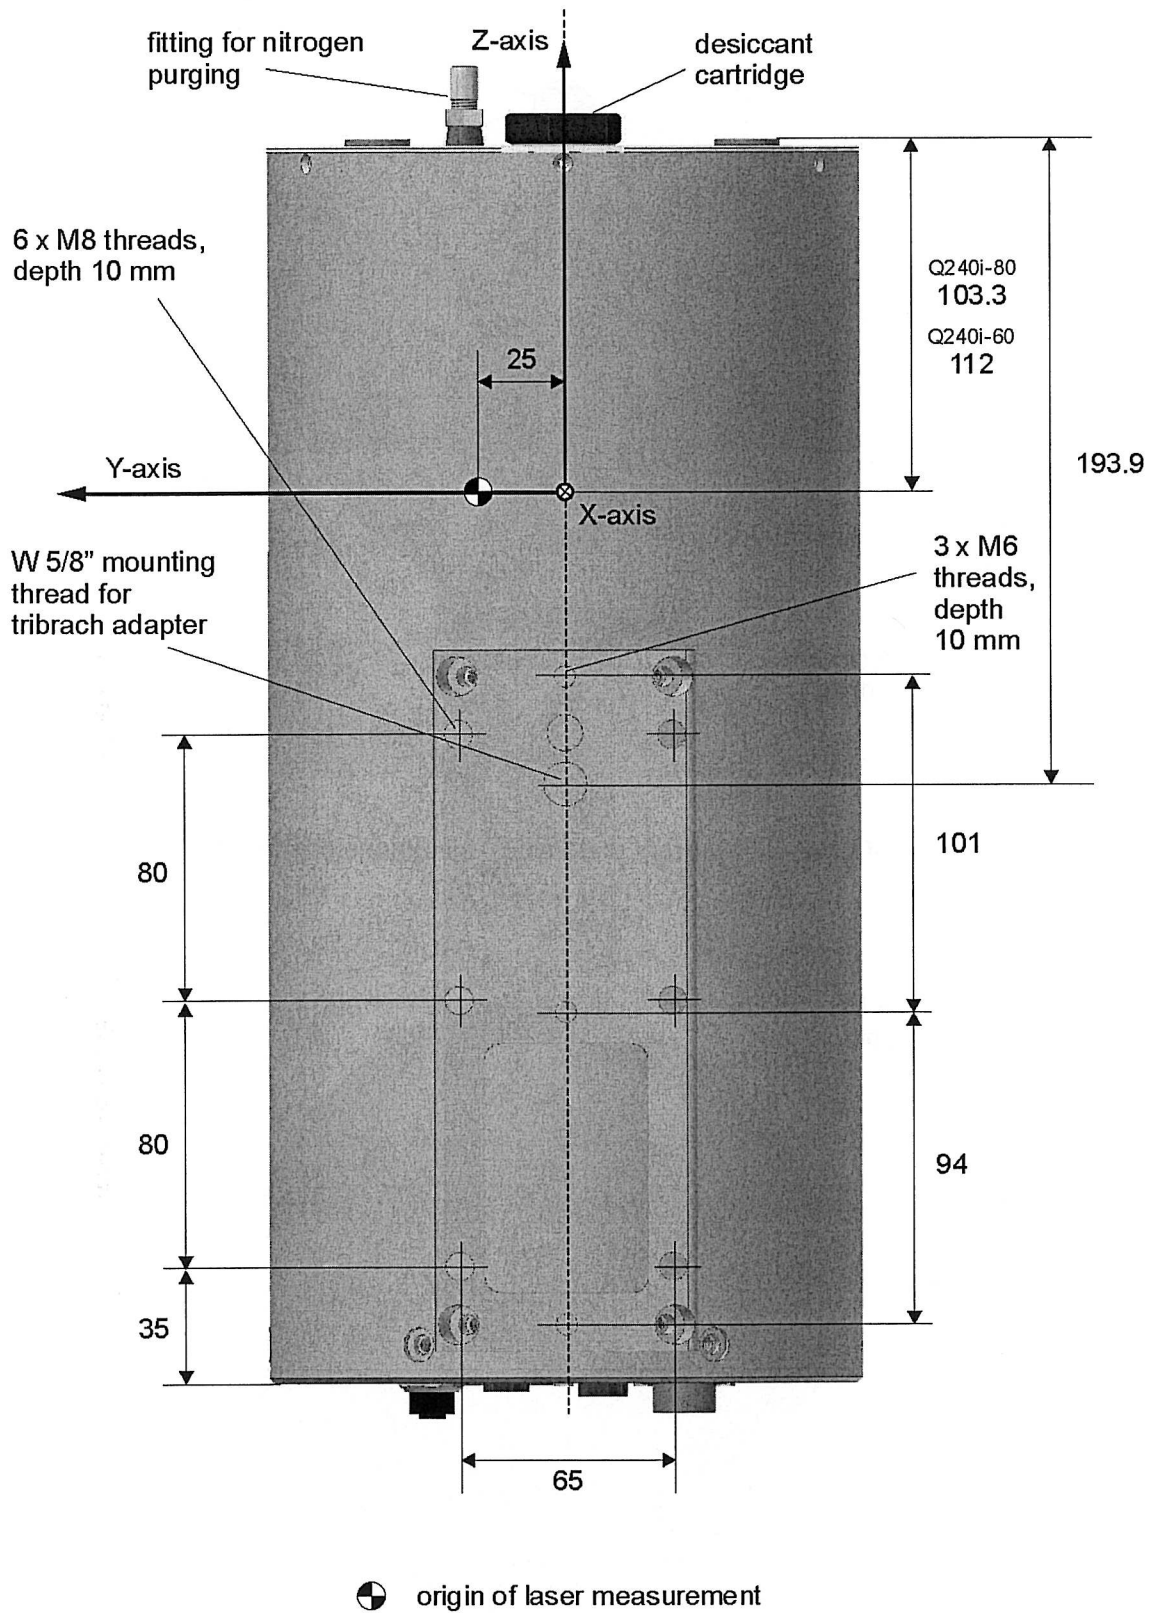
Top view of LMS-Q240i, all dimensions in mm
